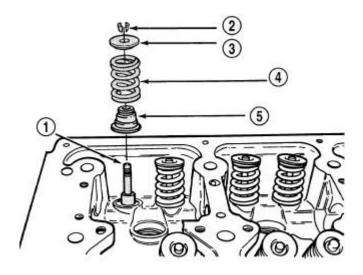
Valve Spring Identification Courtesy of CHRYSLER LLC
